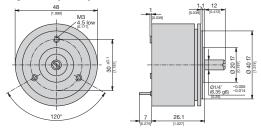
KINAX 3W2 with special drive shaft at front only, \varnothing 1/4", length 12 mm [0.472"].
